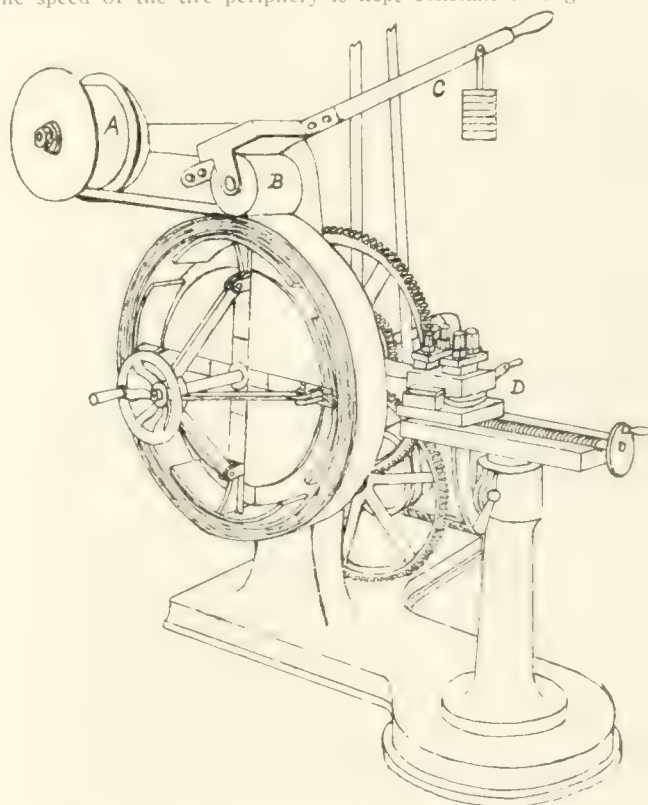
PRICE SOLID TIRE WRAPPING MACHINE.
